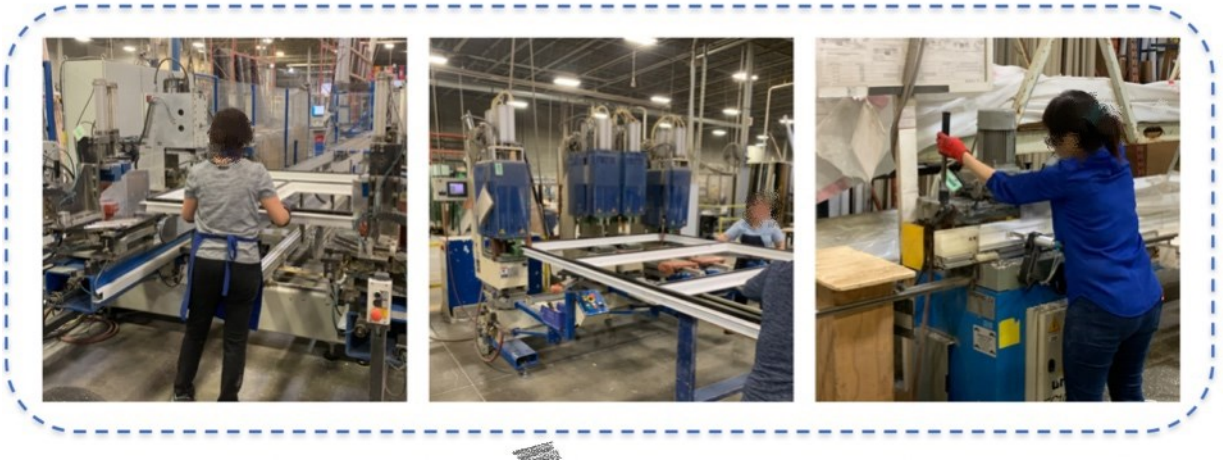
Mullion Prep and Frame Welding Station
